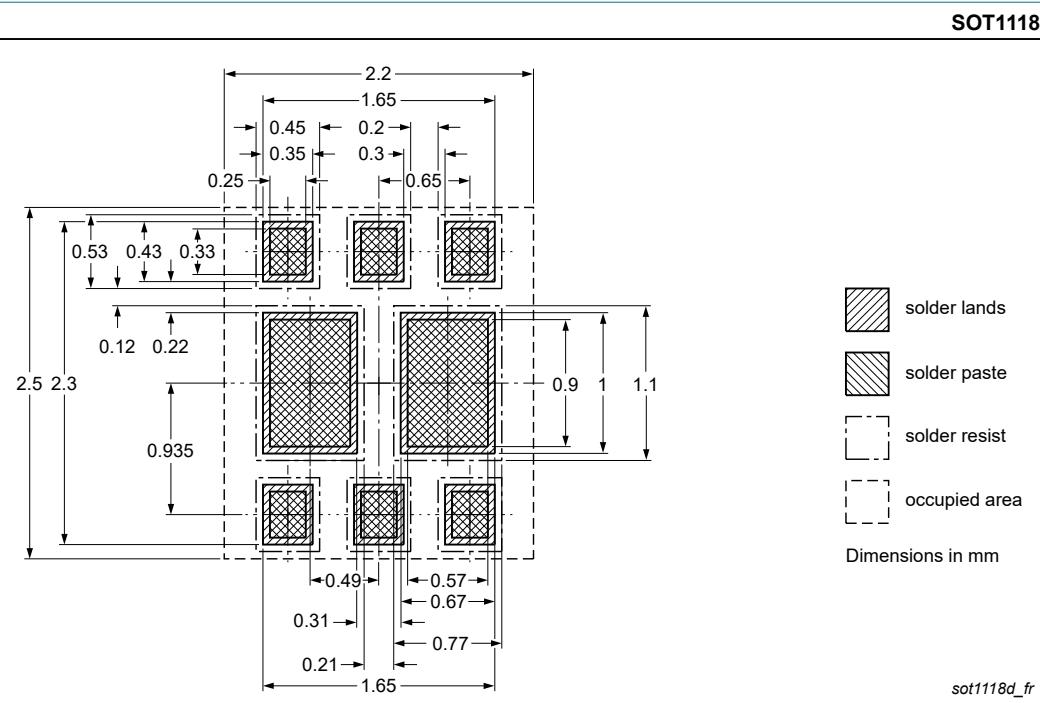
Reflow soldering footprint for DFN2020D-6 (SOT1118D)
